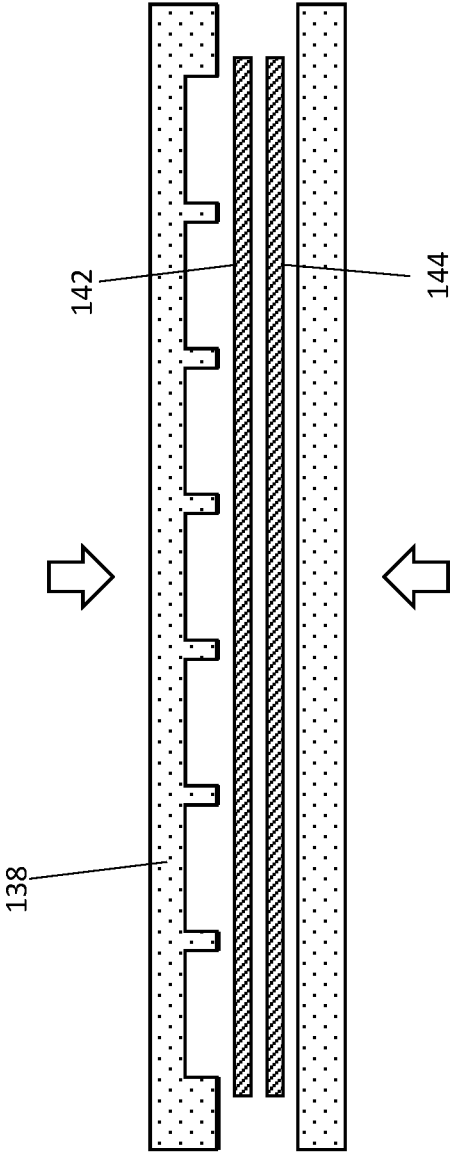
B - DIE: SIDE W/PATTERN, BOTTOM BLANK
